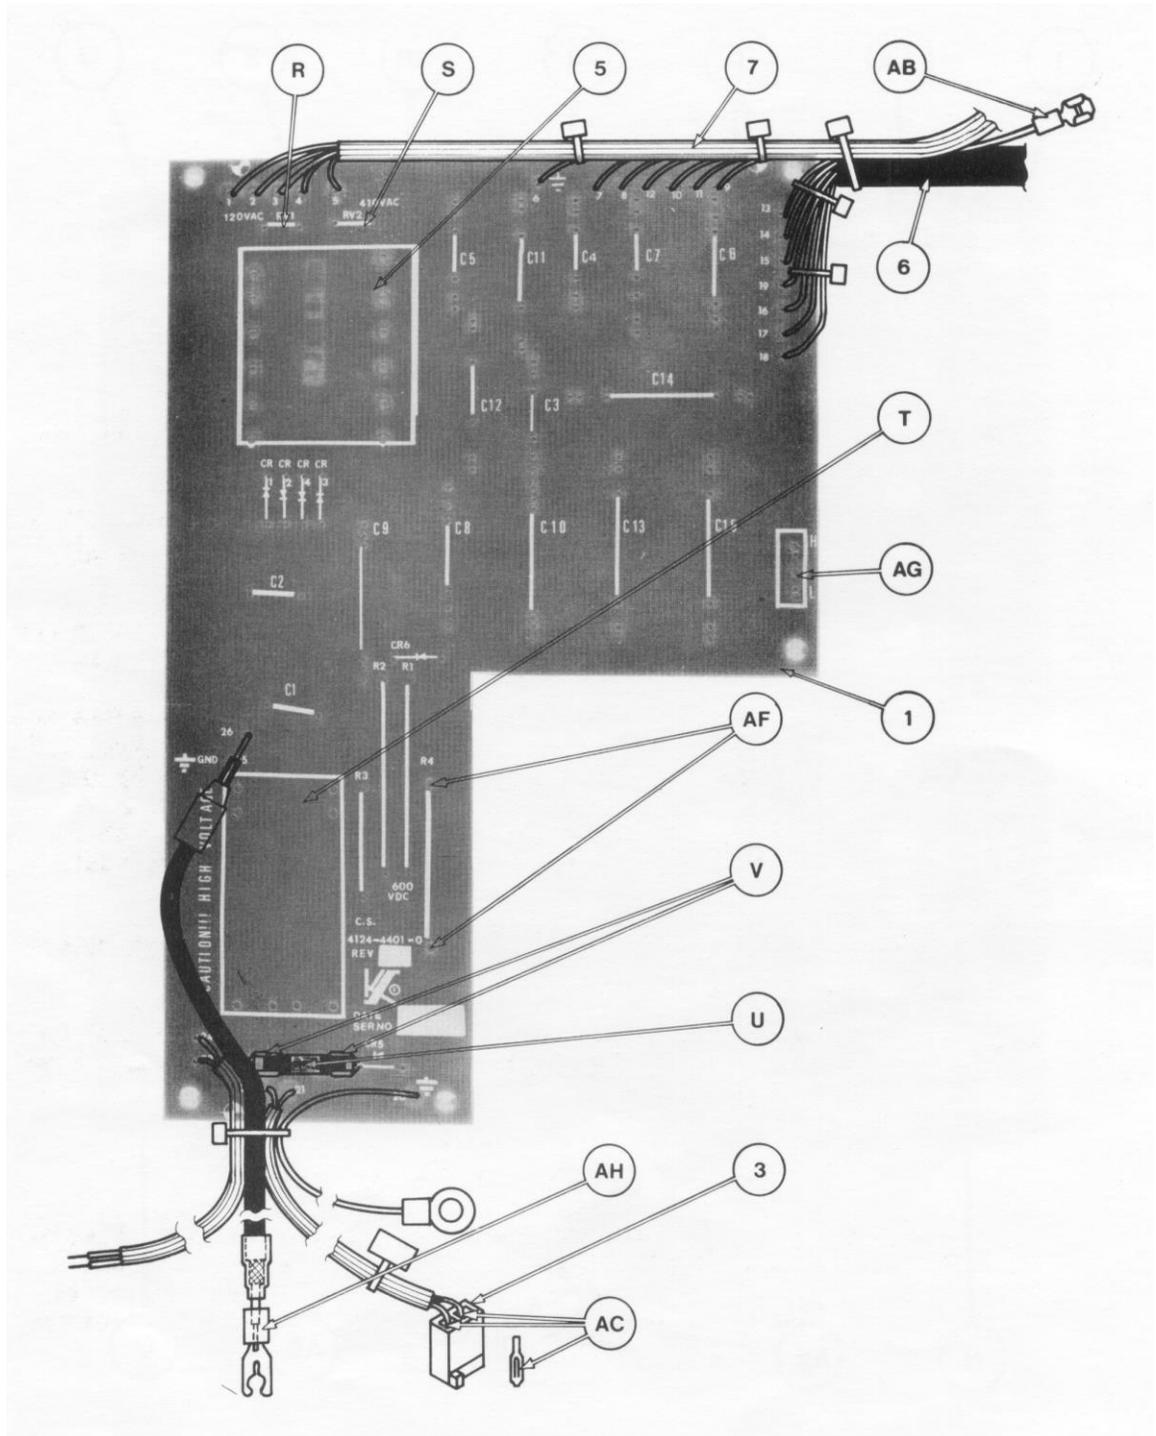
EFO BOARD - COMPONENTS LAYOUT (#4124-4400-0)
